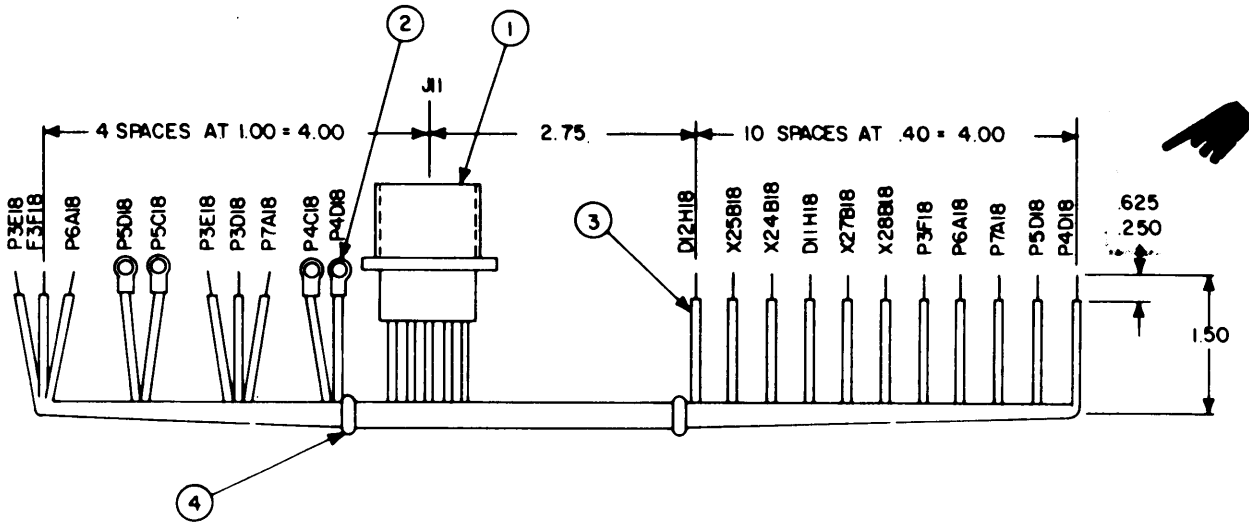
Static Exciter Wiring Harness, Dwg. No. 72-2628, Voltage Regulator Wiring Harness, Dwg. No. 72-2627, and Static Exciter connection wiring Diagram, Dwg. No. 72-2631 (Sheet 1 of 4)
